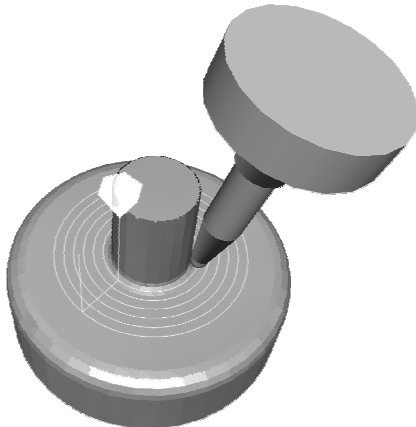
Column test workpiece with the tool positioned at the base of the column.
